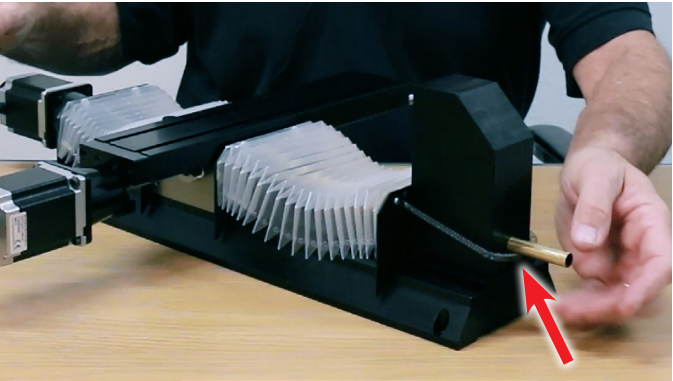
The red arrow is pointing to the backside mounting plate spring located under the brass cover tube.
